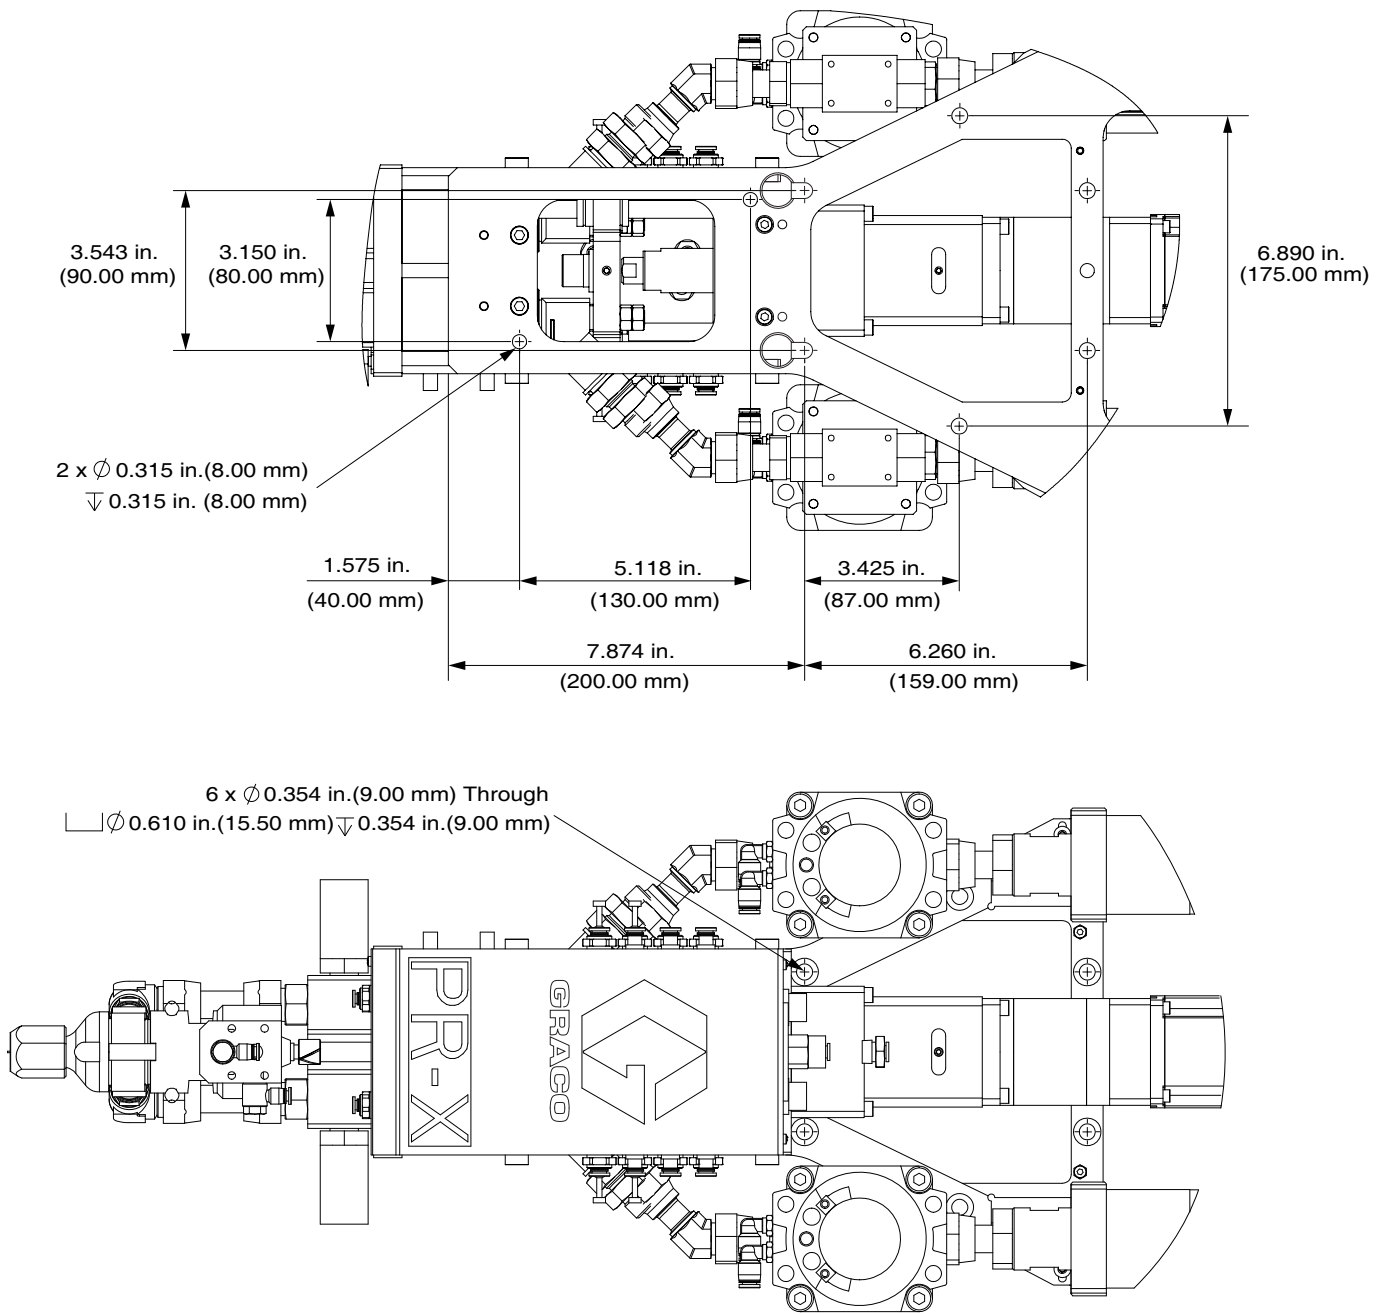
Mounting Hole Dimensions for Installing the PR-X Machine - Cartridge Feed
